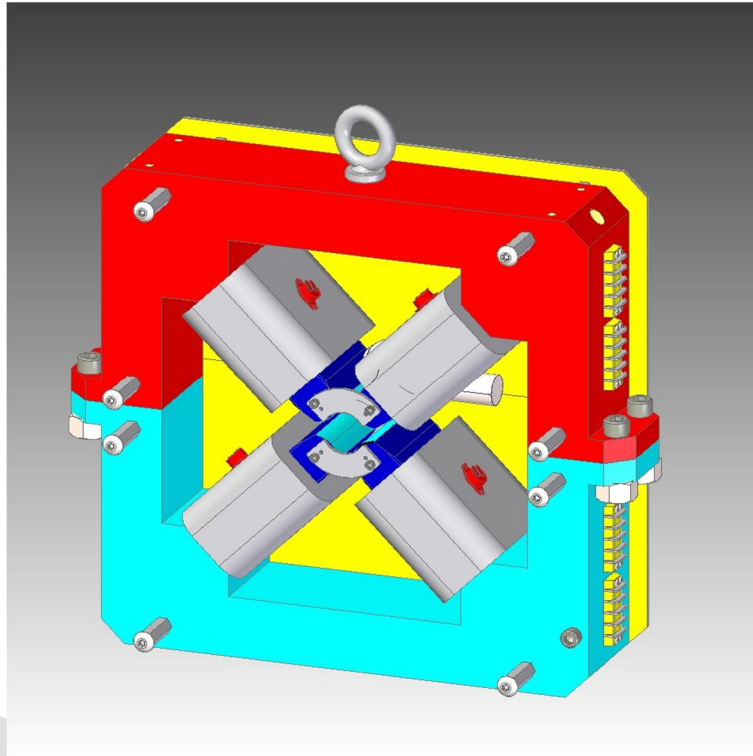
CAD Drawing of 1.26Q3.5 Quadrupole Magnet
